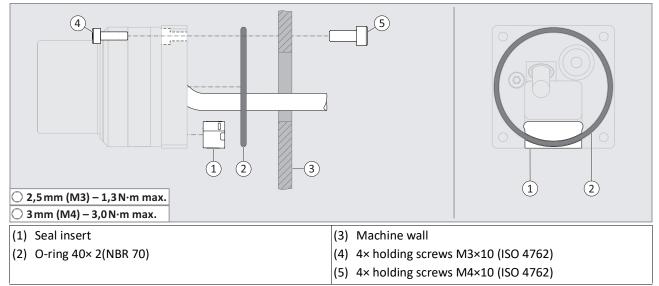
RC66 – Installation with horizontally facing cable.
